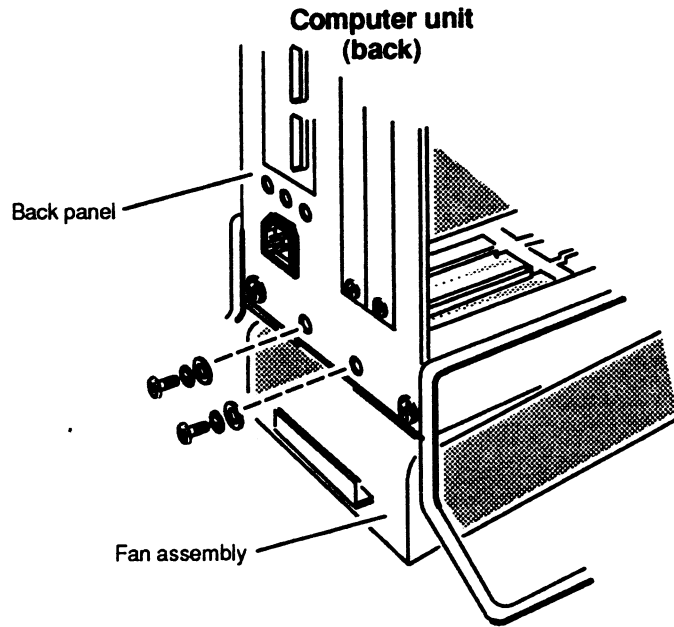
Releasing the Fan Assembly from the Back of the Computer Unit
